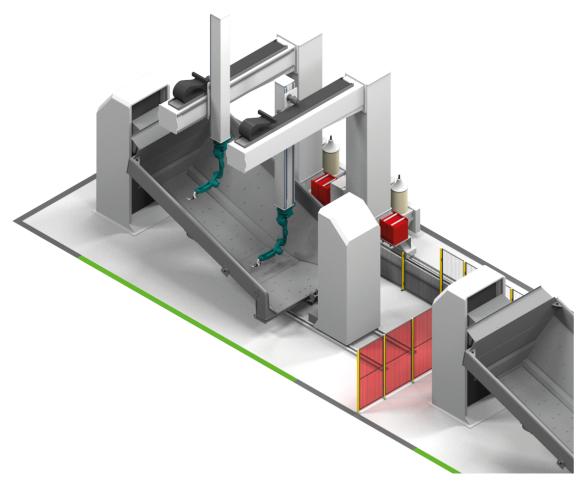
Overview of the robot reach when welding a tilted hauler body, with Z beam fully extended.
